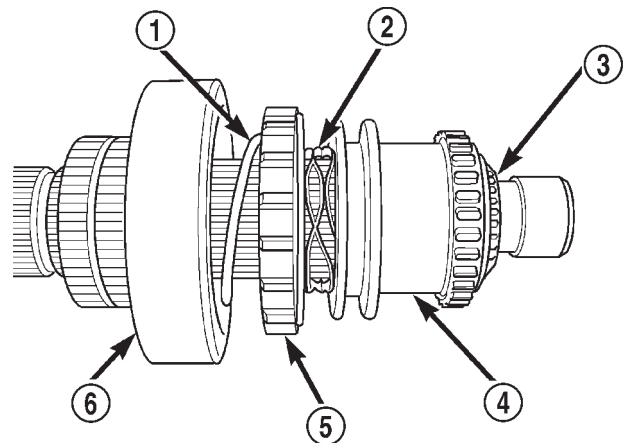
Range Clutch Sleeve, Blockout Spring, Locking Clutch and Spring
